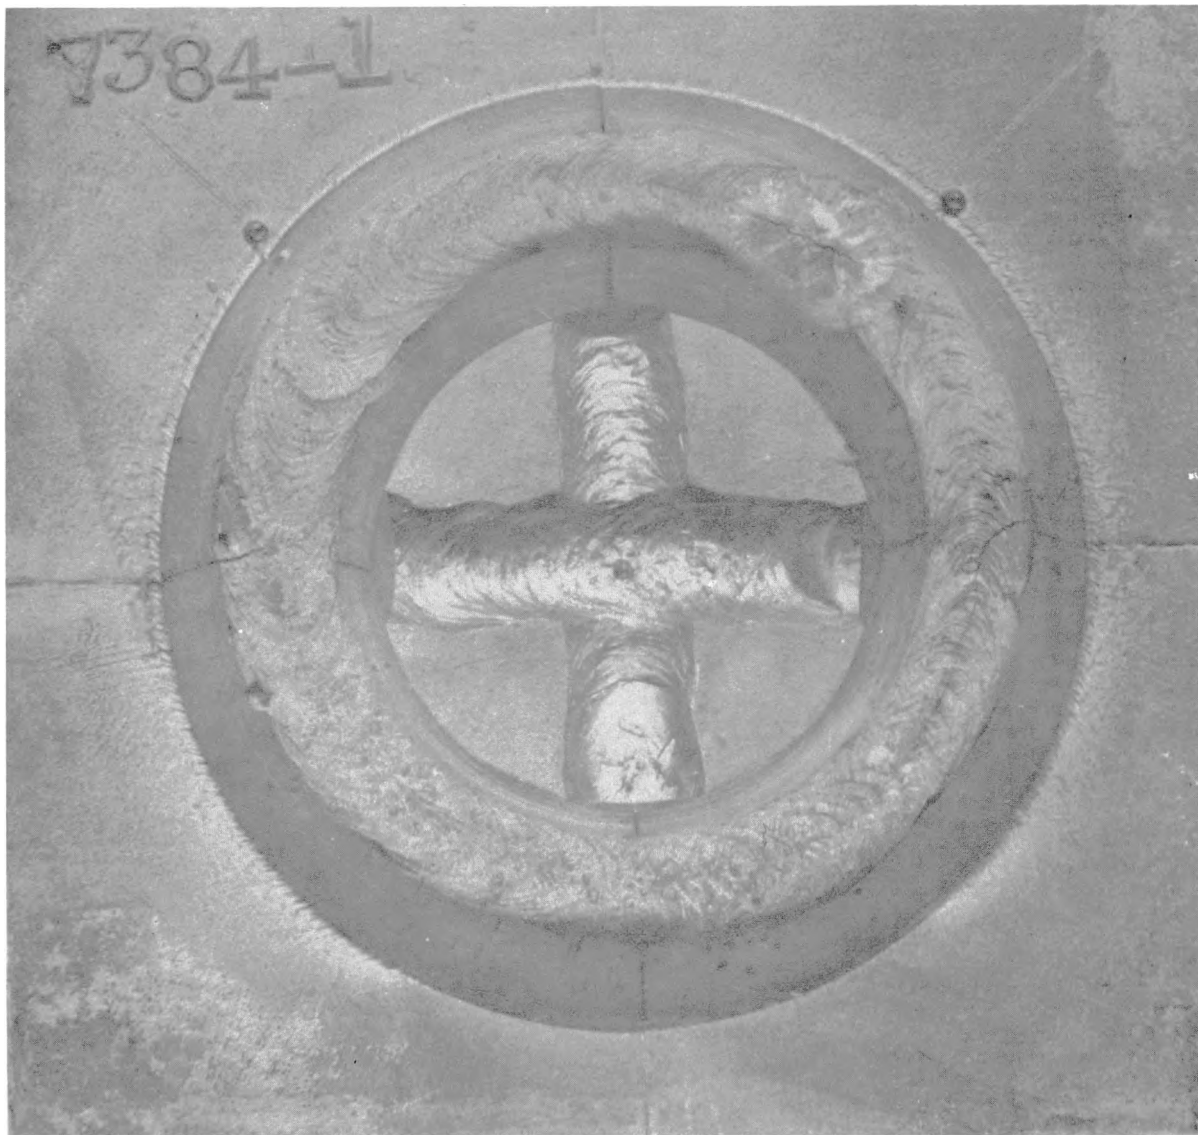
Typical appearance of cracks in segmented circular groove specimen. Approximately 2X.
